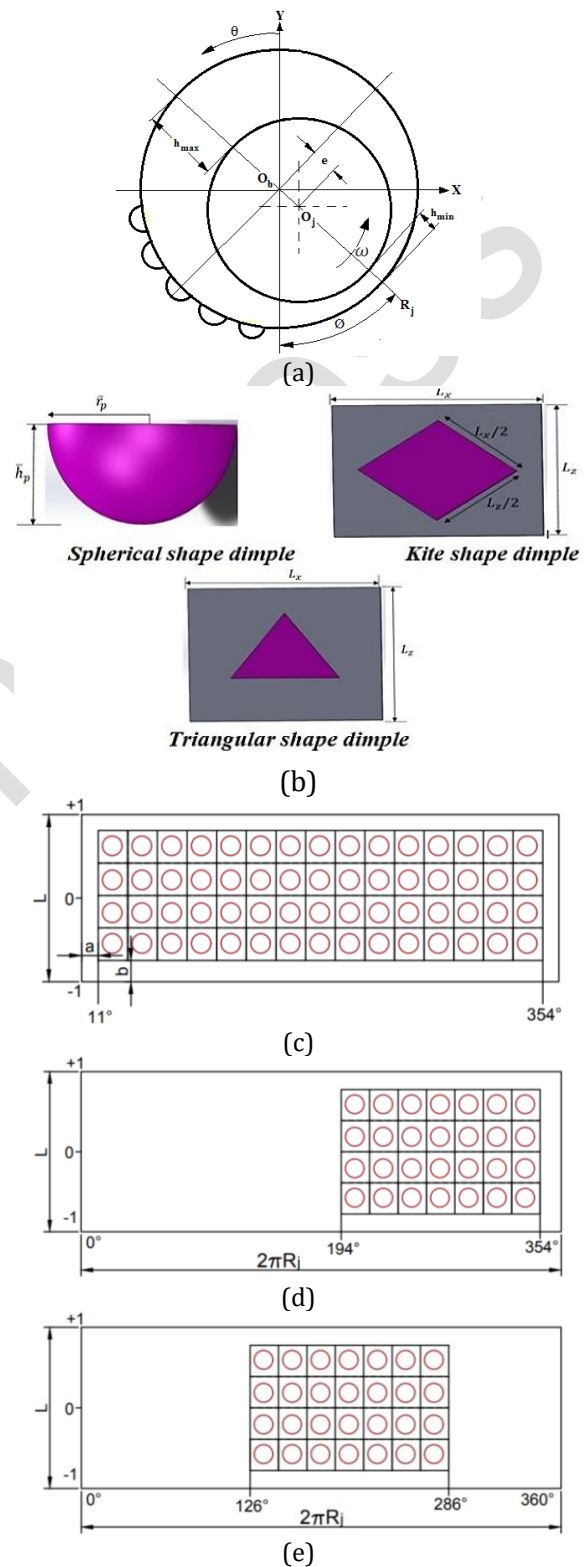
(a) Journal bearing geometry with spherical textures, (b) various textures shapes, (c) Full textured bearing surface, (d) Partially textured-1 bearing surface (e) Partially textured-2 bearing surface.
